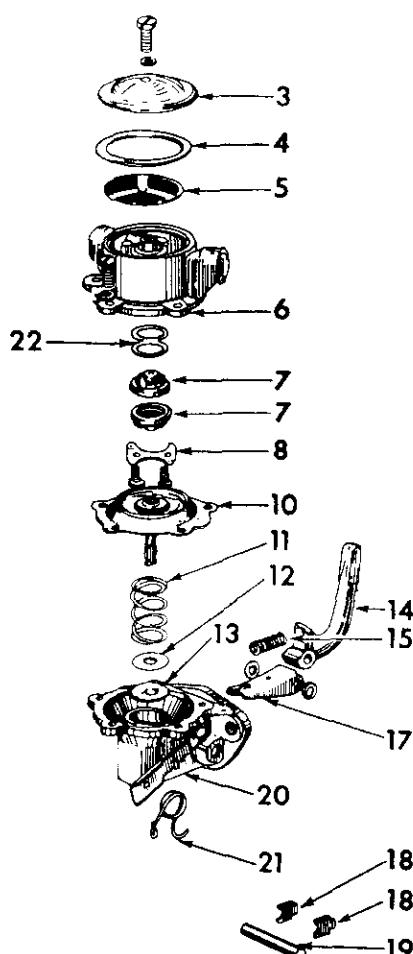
Exploded view of fuel pump used on late Series B-275 and all Series B-414, 354, 364 and 384 tractors. Diesel and non-diesel pumps are similar.
